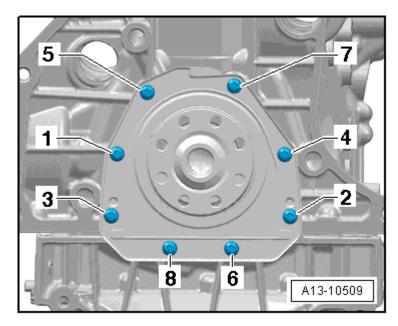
Identifying Sealing Flange Tightening Sequence Courtesy of AUDI OF AMERICA, LLC
